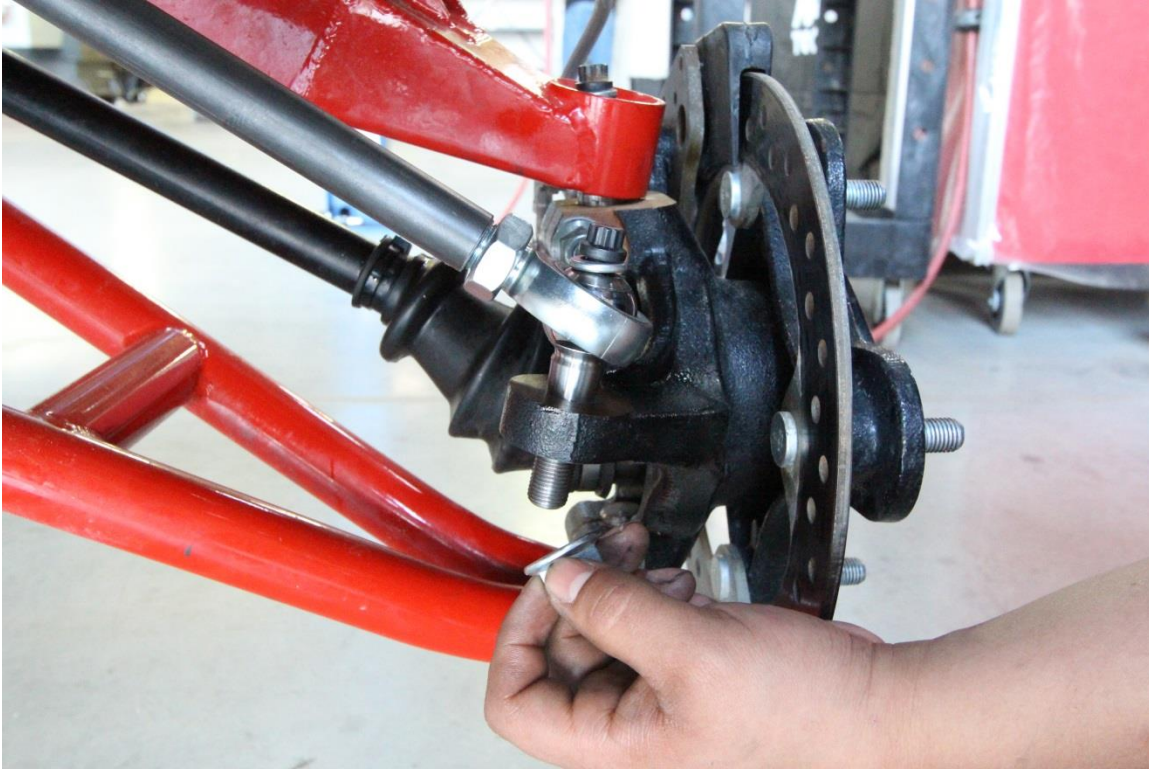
Shows the stud in the spindle, rod end on the stud, then spherical washer on the rod end held in place by lock washer and 12 point bolt.
